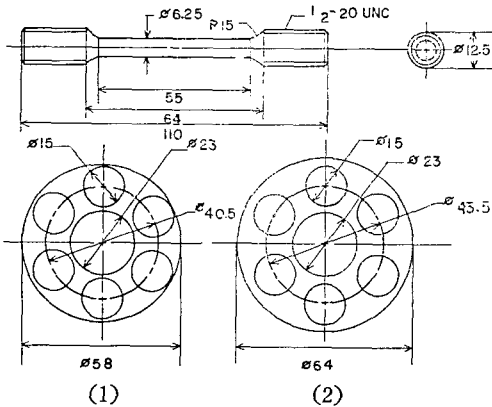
Tension specimens in the first machined bar for SM20C(1) and SM45C(2), and tension specimen dimension
